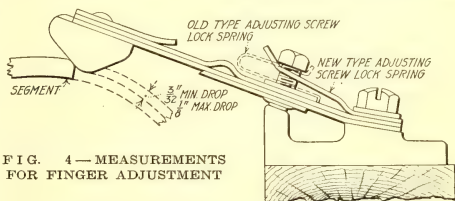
MEASUREMENTS FOR FINGER ADJUSTMENT
